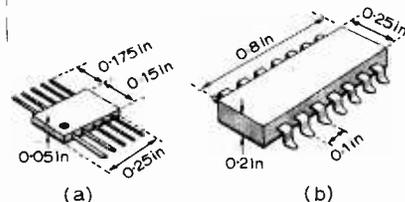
Typical low-power linear microcircuit packages for attachment to copper side of printed circuit board: (a) Flat pack; (b) ready-to-reflow dual-in-line with preformed leads.
